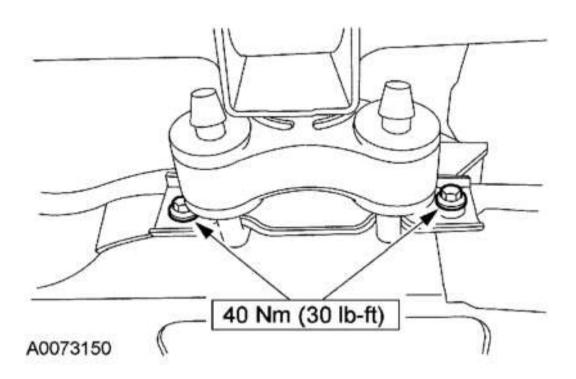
Installing RH Exhaust Bolts Courtesy of FORD MOTOR CO.
